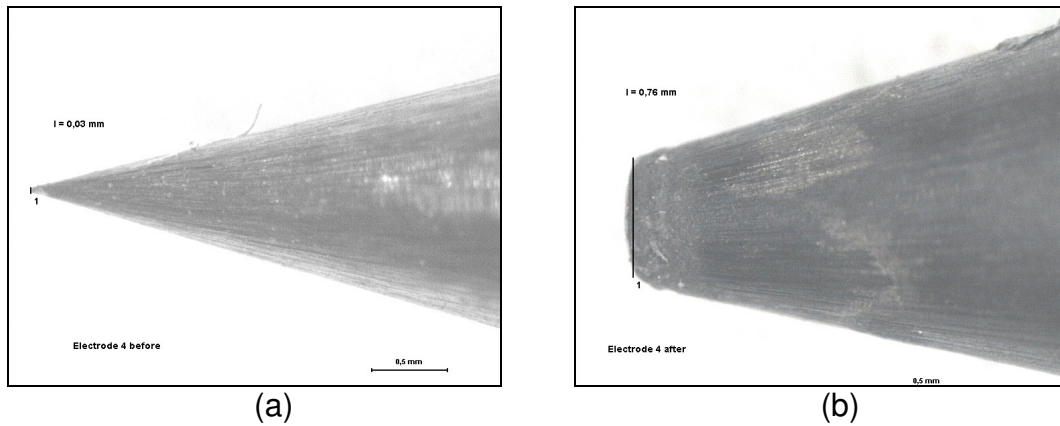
Angle of Electrode 4 used for experiment number 5: (a) before welding $\leq 30.58^\circ$; (b) after welding $\leq 48.45^\circ$.
